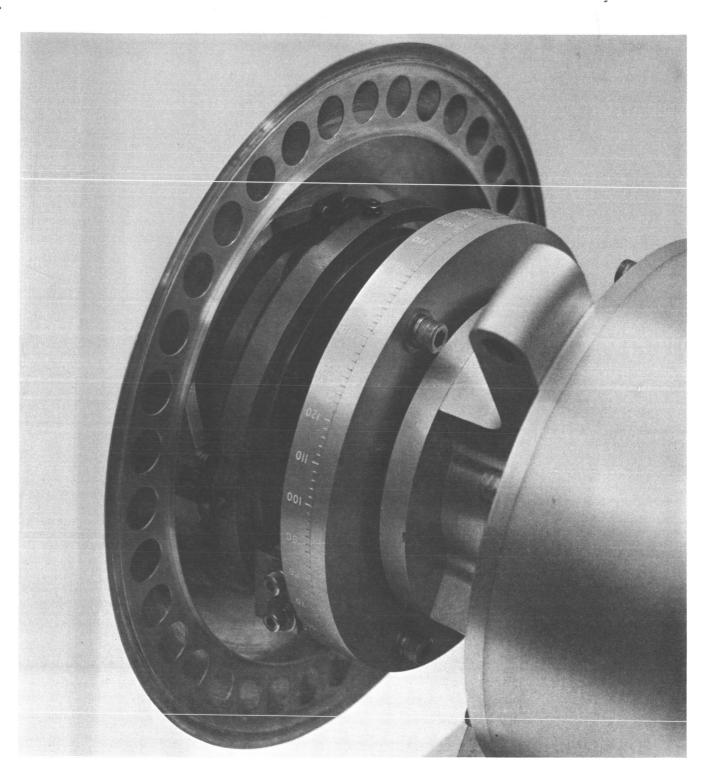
Back view of subdish assembly showing mirror stiffening ring, bearing holders, cam follower, cam wheel, counterweight, indexing plate, and tripod head
